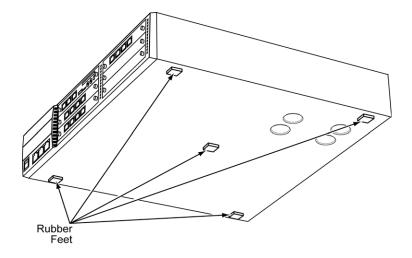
Attach Rubber Feet to CHS2U-US Chassis
